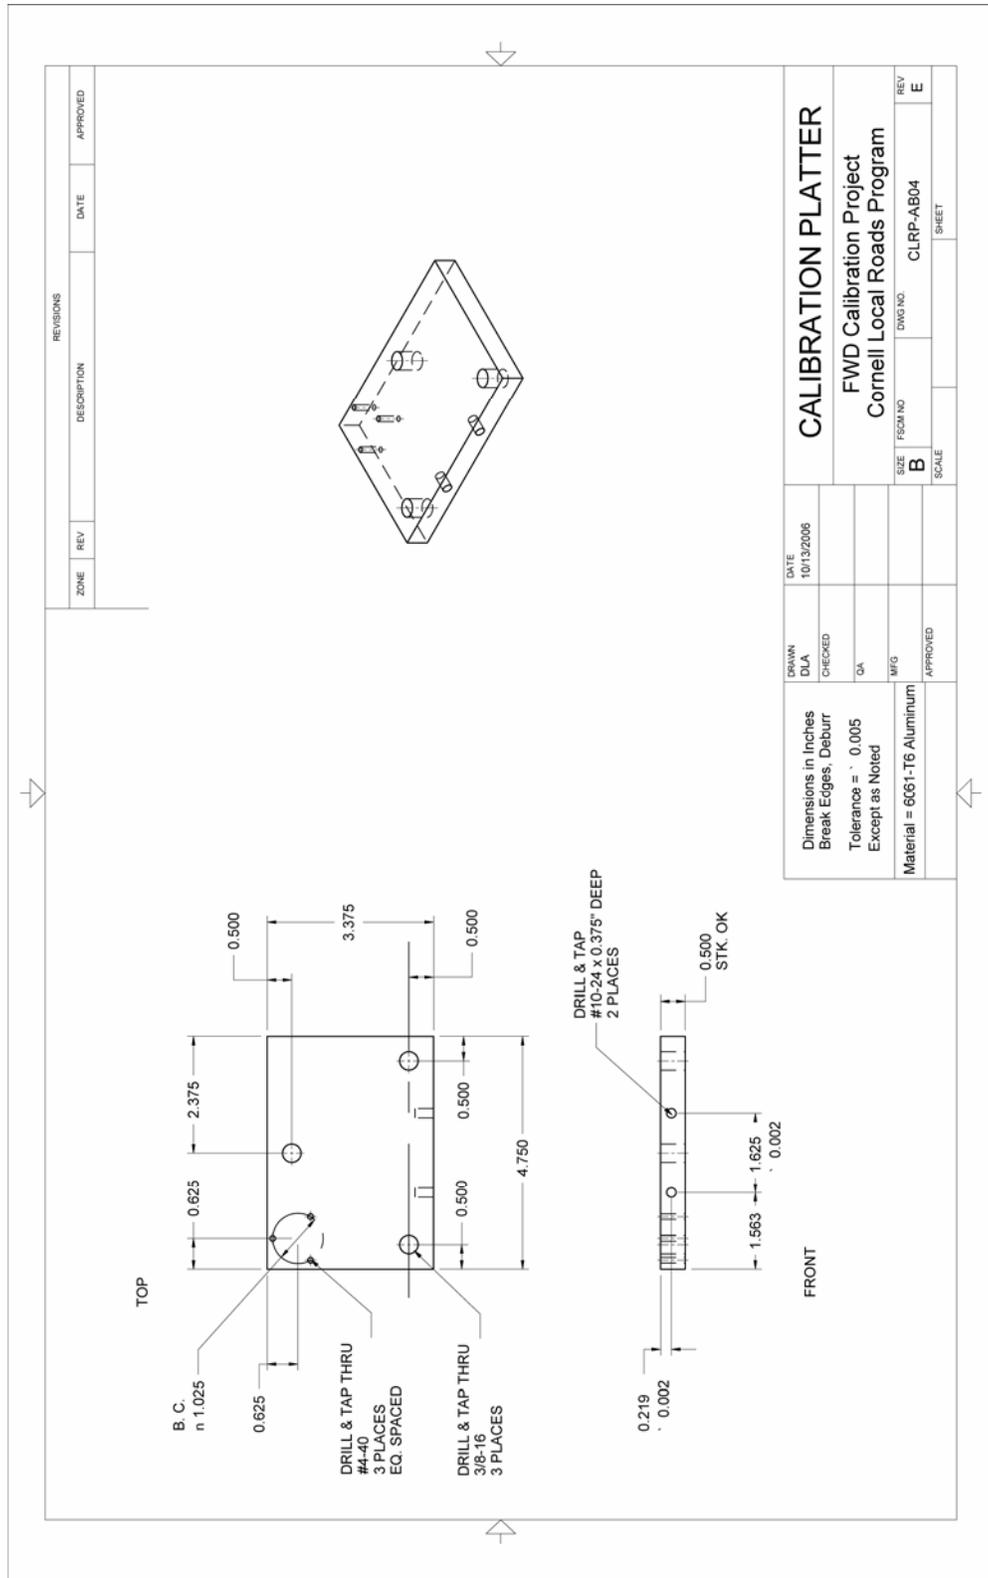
Drawing. CLRP-AB04 Calibration Platter.
